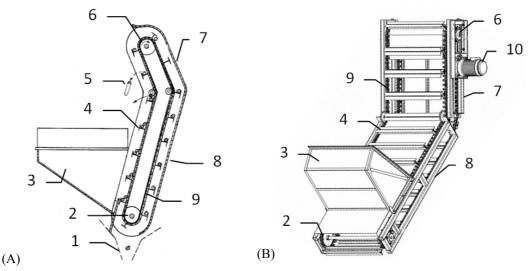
Components of sugarcane planter metering device: 1- Dropping Tube, 2- Sprocket, 3- Holding Tank, 4- Billet Cupboards, 5- Extra Separated Billets, 6- Driver Sprocket, 7- Upper Chassis, 8- Lower Chassis, 9- Conveyor Chain, 10- Electric Motor.
